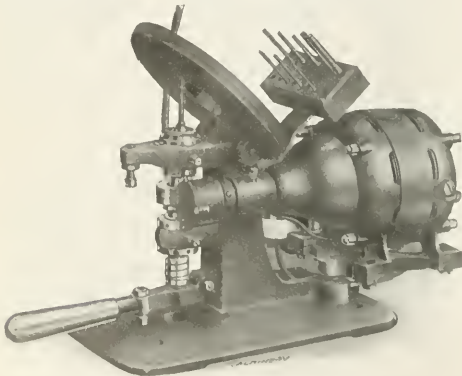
Opposite Side of Machine showing how Motor and Gearing is covered
